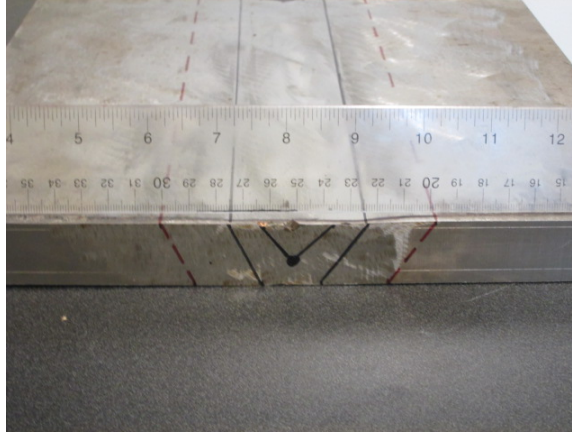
12"x12"x1" 304 stainless steel plate used for weld sensitization measurements
